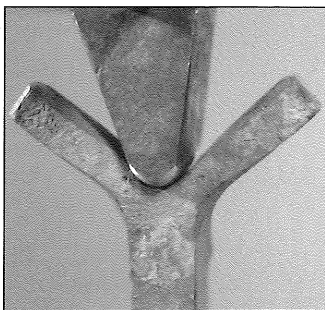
With the sides open use successively larger fullers to open the root of the cut
